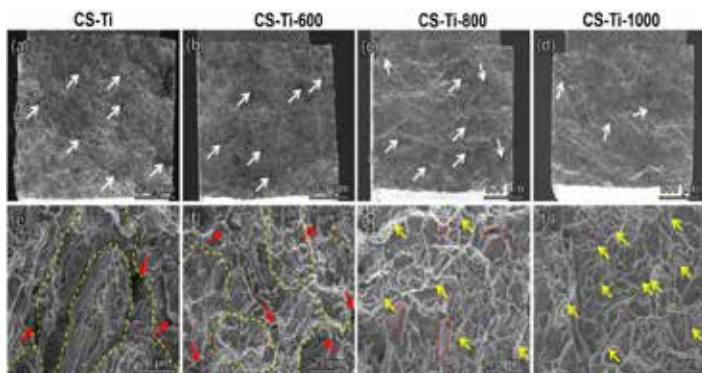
Fracture morphology of CSAM Ti after tensile test at different condition.
